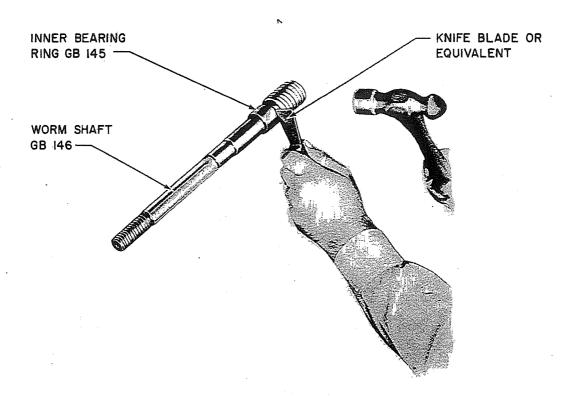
Worm Shaft, Method of Loosening Inner Bearing Ring GB145
